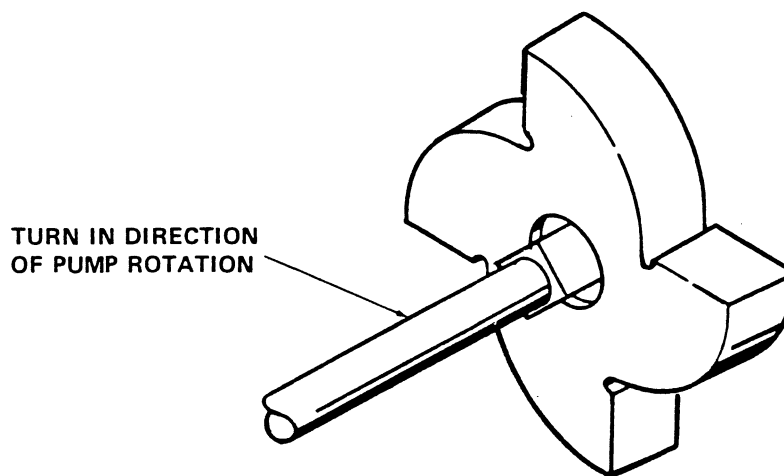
48731-006 Impeller Tool With Drive Wrench
